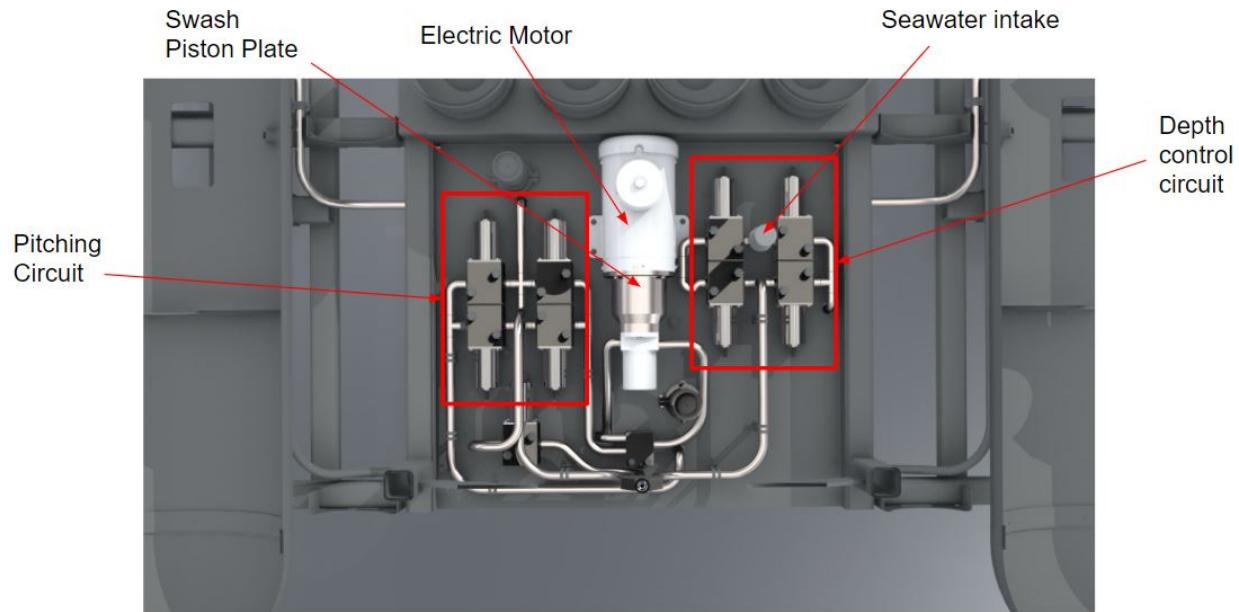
Top view of the valves panel with depth control and pitching circuit
